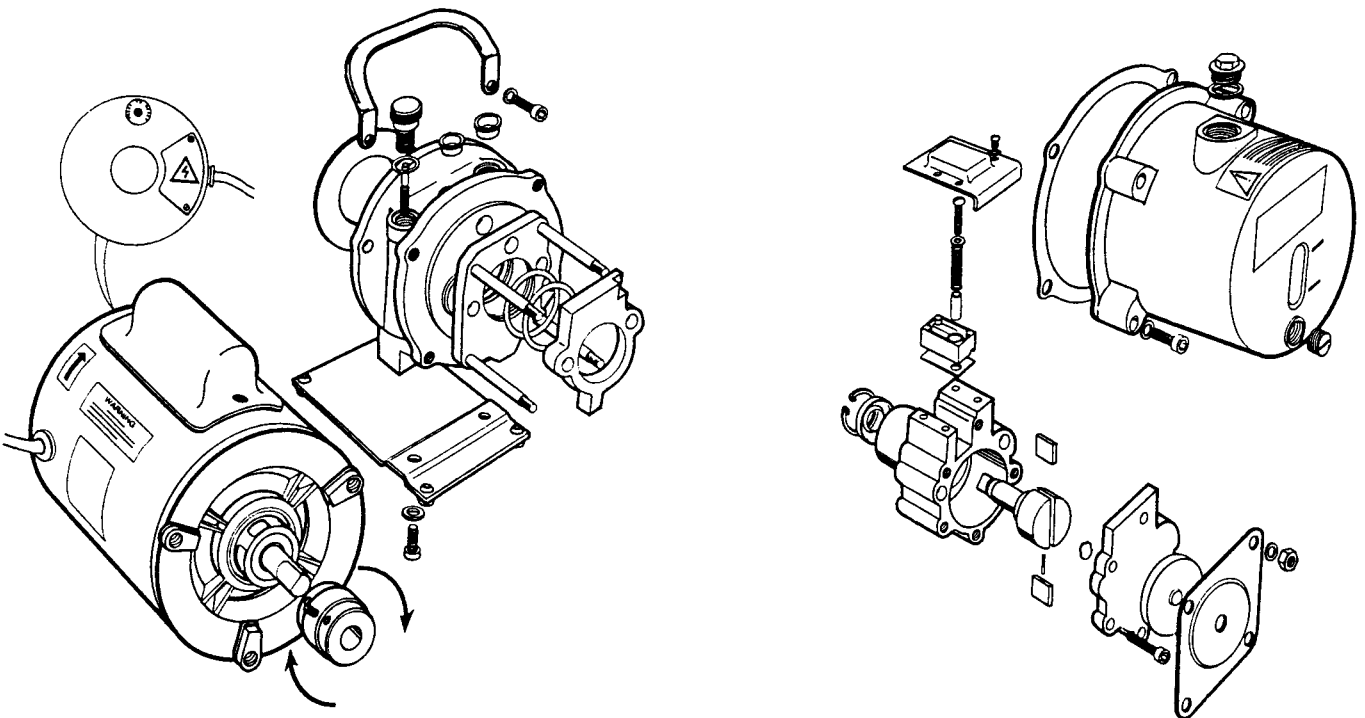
EXPLODED VIEW - VACUUM PUMP MODELS - SPEEDIVAV
